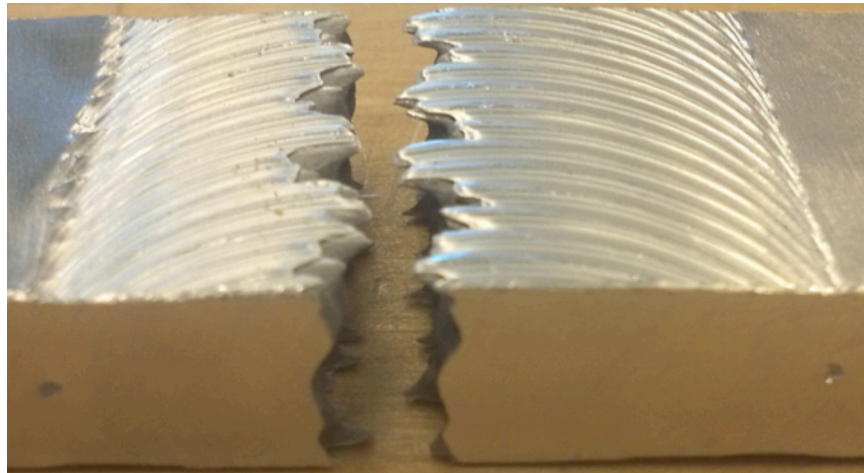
Fracture surface of uncleaned weld. Note perpendicular nonductile fracture with undulations resembling those of the white line shown in figure 12.
